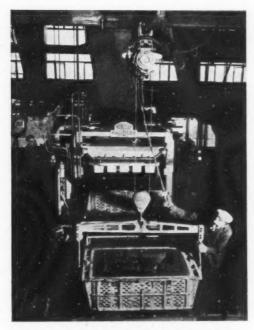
Completed Moulds are Transferred from the Moulding Machine to the Plate-type Conveyor by Air-operated Travelling Hoists
